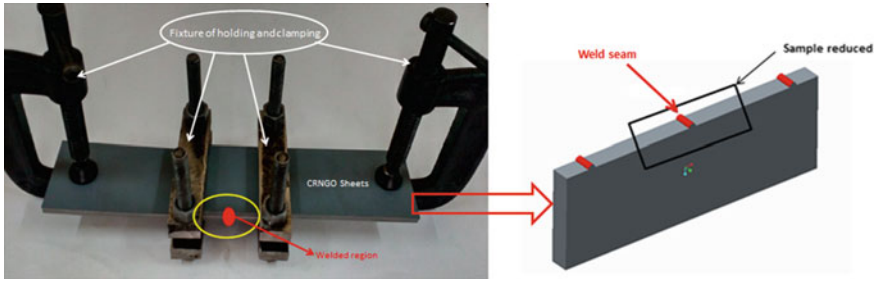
Clamp and fixture for holding CRNO sheets
